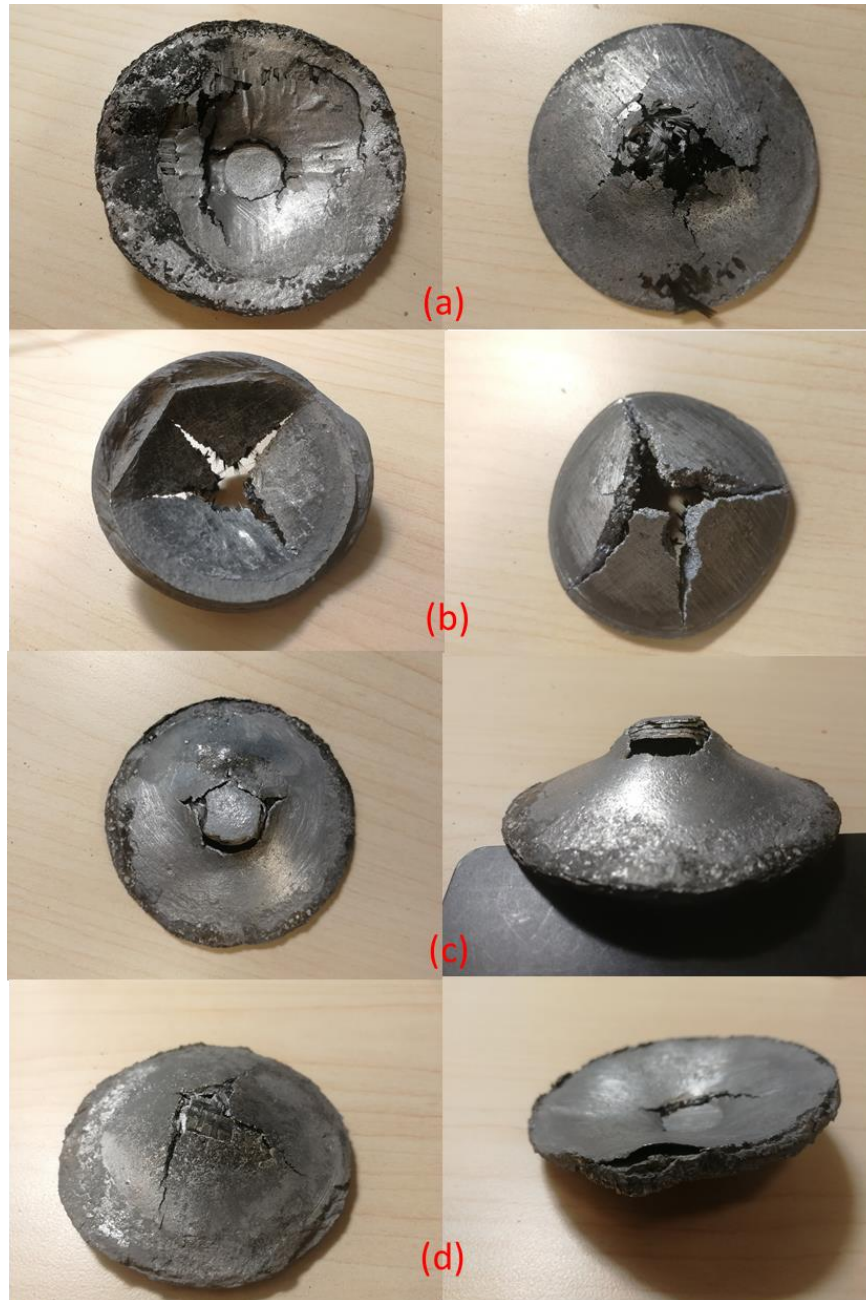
Fracture modes of composite samples after piston-on-ring bend tests: (a) S₃; (b) S₆; (c) S₁₂; (d) S₁₃
